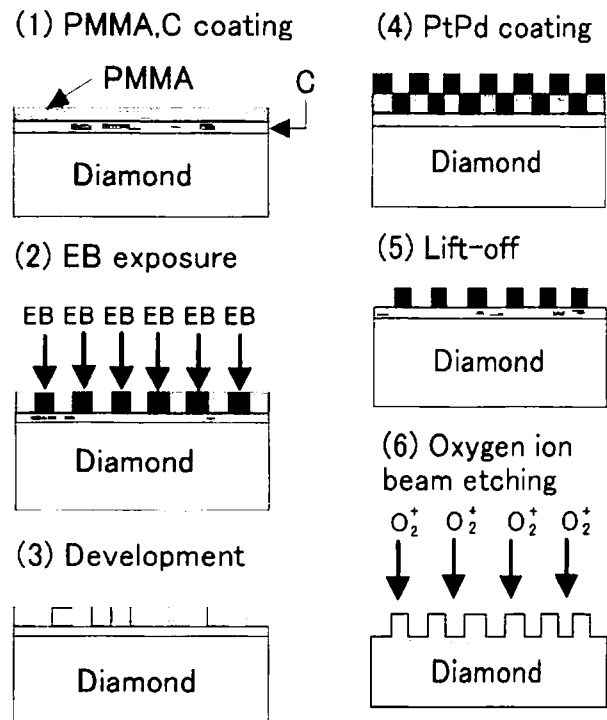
Fabrication process of diamond mold using a carbon intermediate layer (PMMA/C/diamond process).
